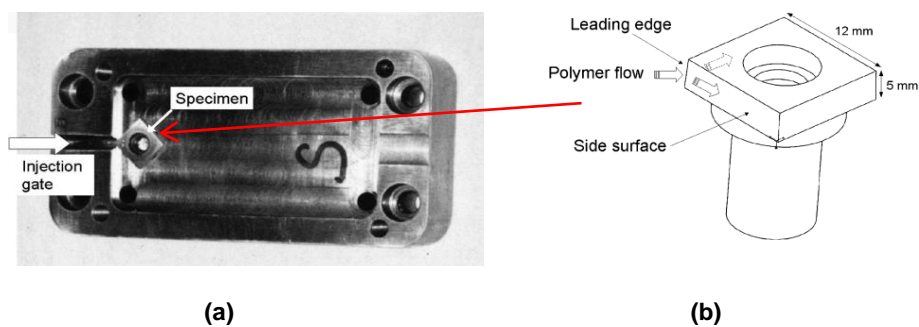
Injection mould (a) and inspected sample (b) [31]
